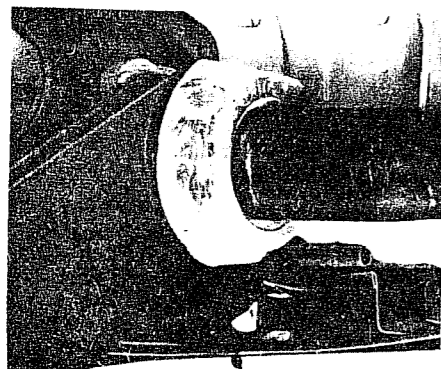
The outer rubber bush must be installed as shown. D/J axle.
